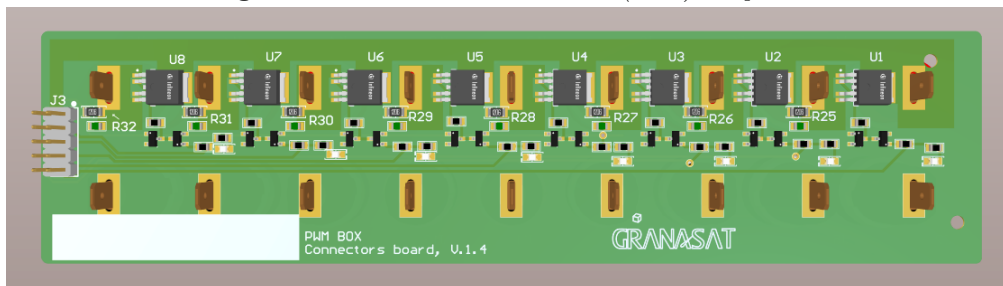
[Printed Circuit Board \(PCB\) 2](#) bottom view
